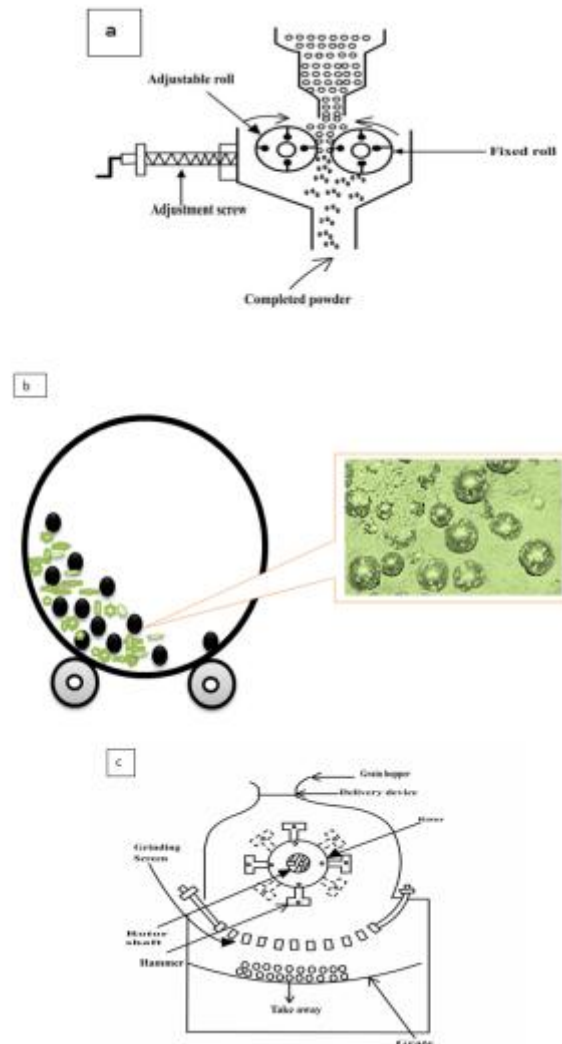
Mechanical preparation method, to obtain ceramic particles: (a) roll crushing (b) ball mill and (c) hammer milling
